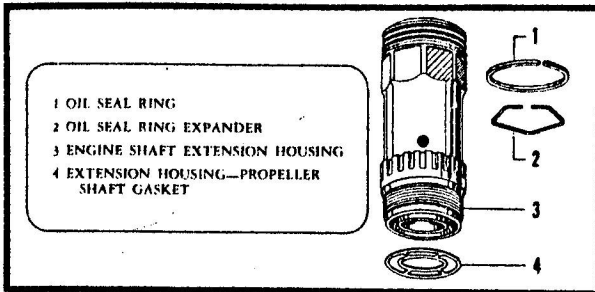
Engine Shaft Extension Assembly for Single-Acting Models 24E60, 23F60, and 24F60
